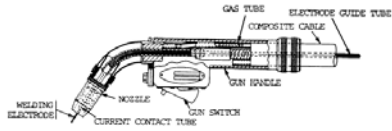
Typical semiautomatic gas-cooled, curved-neck gas metal arc welding gun.
